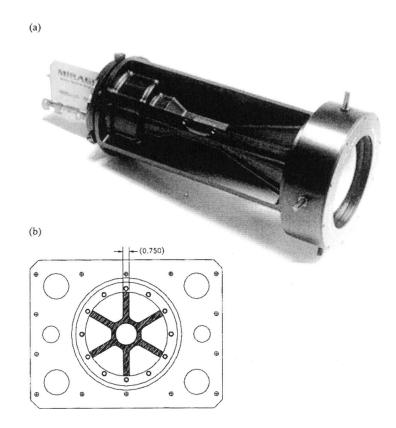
(a) Exterior view of the collimator assembly of Fig. 4.20 without its mounting flange. (b) Section view through the center of the assembly. (Courtesy of Janos Technology, Inc. Keene, NH)
